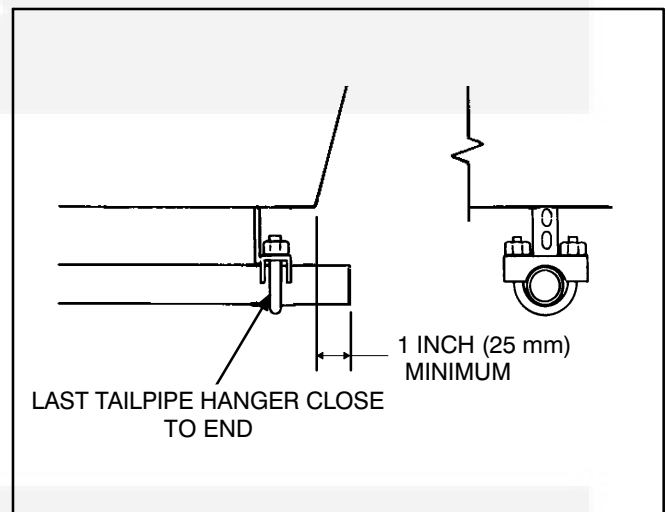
TERMINATING THE EXHAUST TAILPIPE
